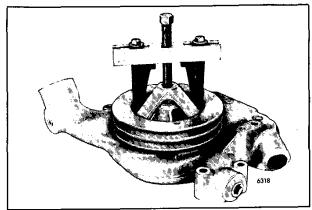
Removing Pulley From Bearing Shaft Using Tool J 34117
